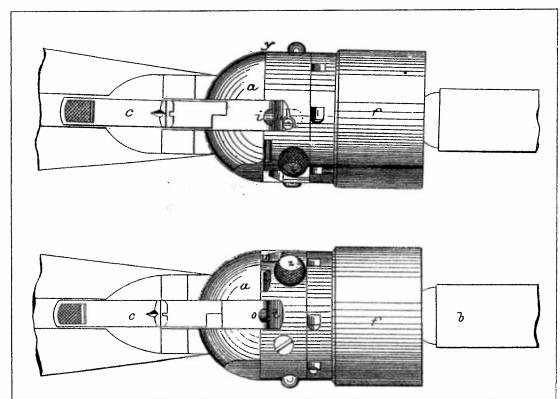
Top view of frame, cylinder and conversion ring showing two positions of conversion ring. (Modified from patent drawing)
